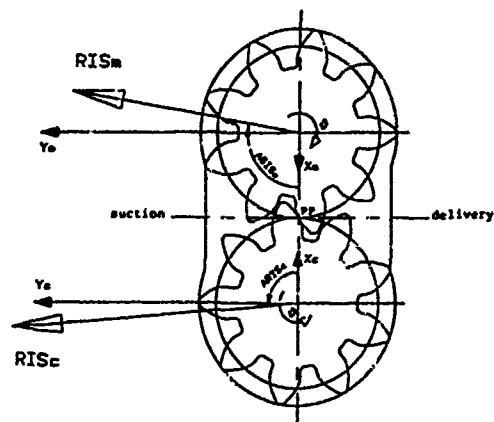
Resultant forces on the gear shafts and angles. RISc, ARISc: driven gear. RISm, ARISm: driving gear.
